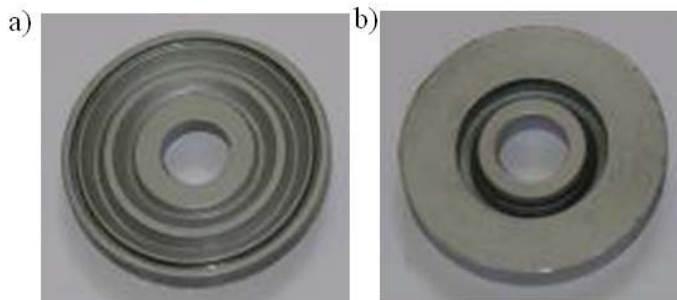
a) Simply supported fixture, b) Clamped supported fixture
